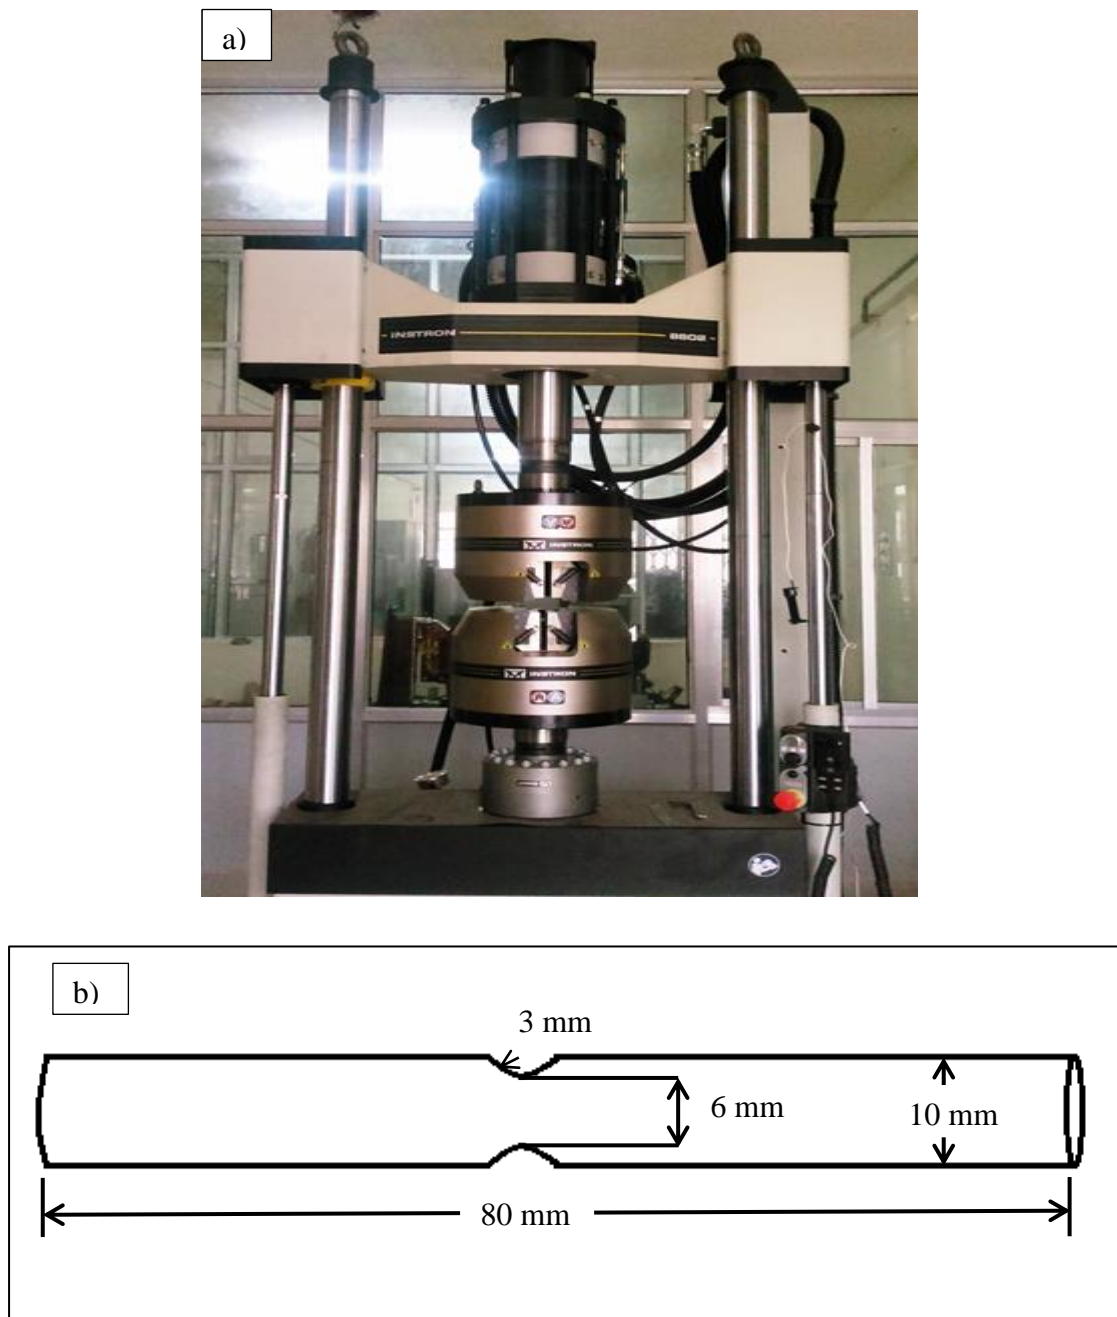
a) Universal testing machine, b) Notch tensile sample dimension
